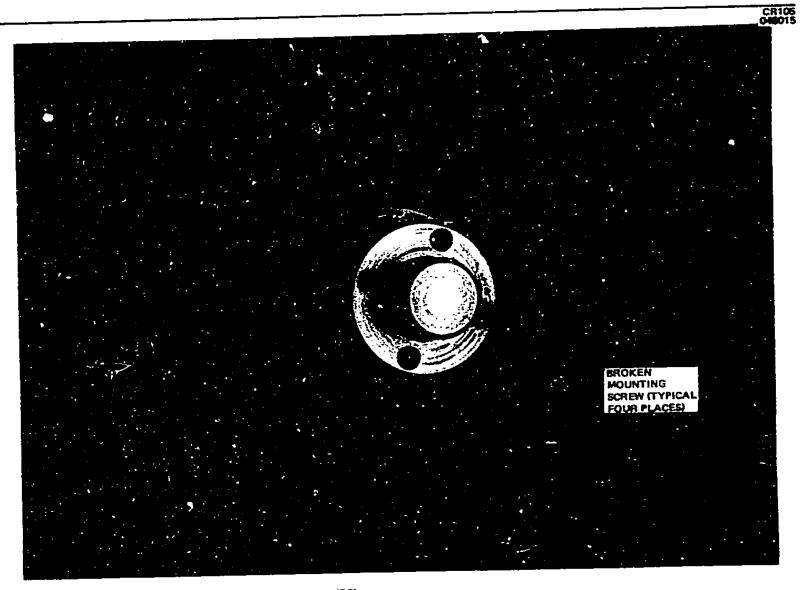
Broken Flexspline Mounting Screws in PCP Pump (P3)
